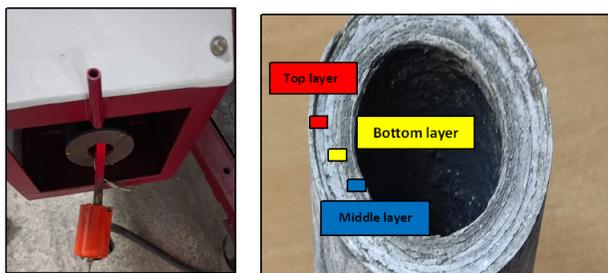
Bottom squishing and centrifugal casting machinery for stir casting & FGM fabricated component
